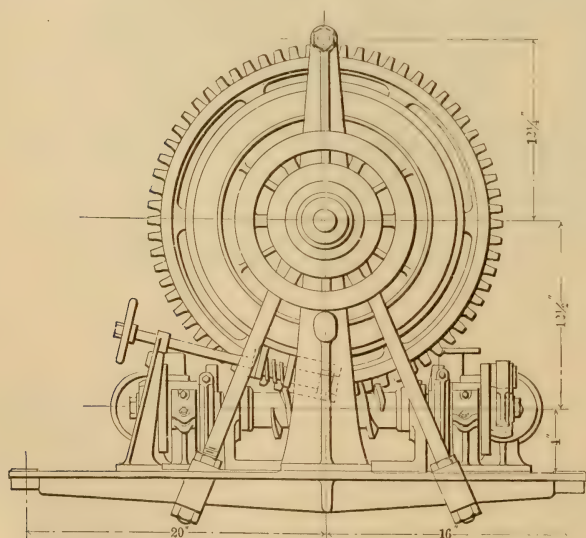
END VIEW OF WINDLASS SHOWN IN FIG. 28.
